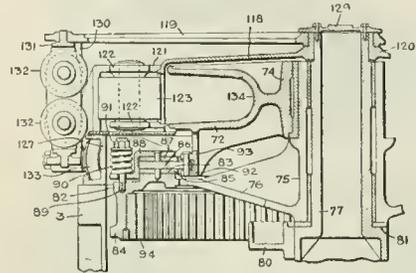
Cross Sectional View of the Cable Guiding Devices taken through Line x-x of Fig. 21
